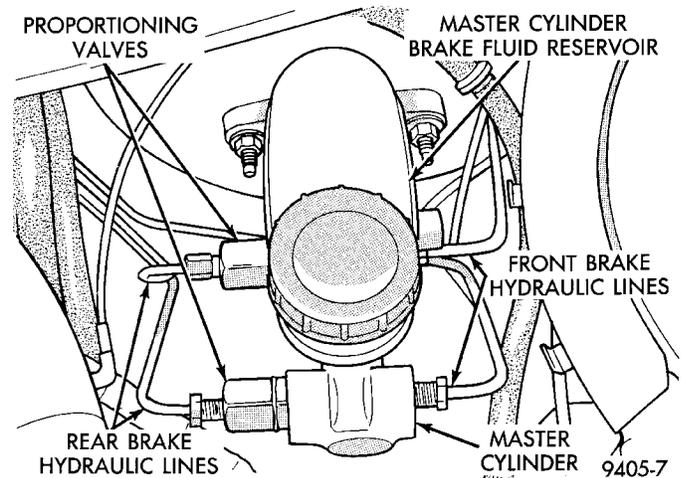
Master Cylinder For Non Anti-Lock Brake Equipped Vehicles
